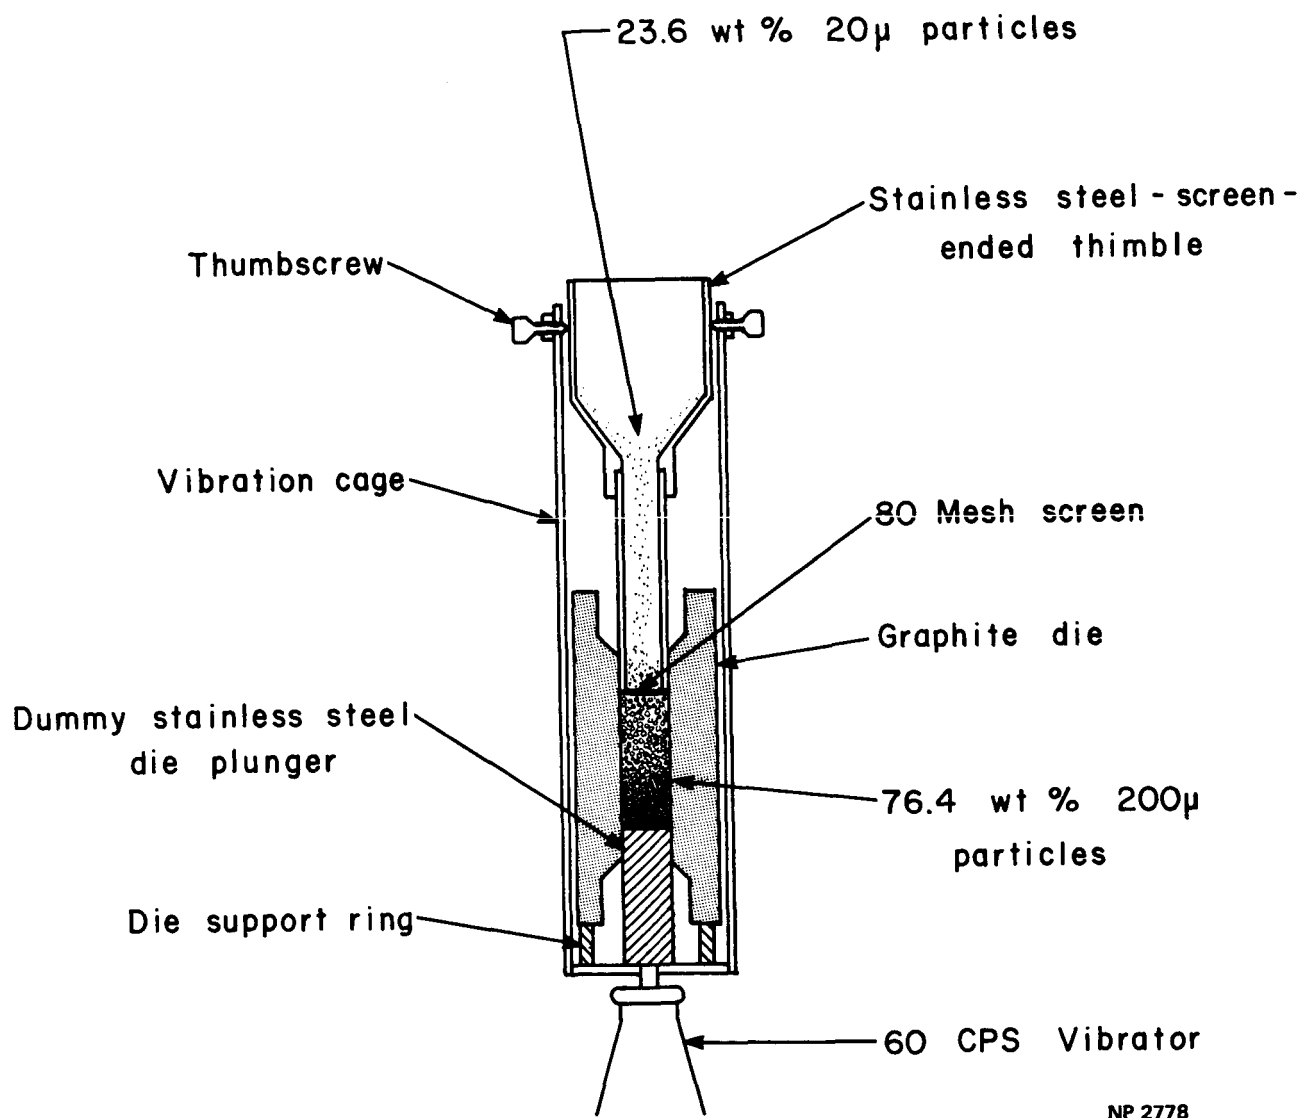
HOT PRESSING DIE LOADING APPARATUS
